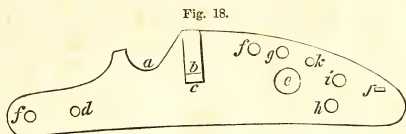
Lock-plate, half-size, showing the position of the holes, &c. *a*, cone-seat notch; *b*, bolster; *c*, main-spring notch; *d*, hole for main-spring pivot; *e*, hole for arbor of tumbler; *f*, *f'*, side-screw holes; *g*, hole for bridle-screw; *h*, hole for sear-screw; *i*, hole for sear-spring; *j*, sear-spring stud mortise; *k*, bridle pivot hole.
